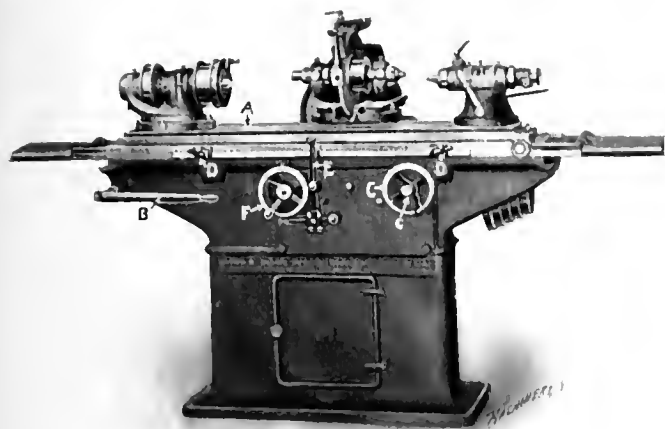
A Universal Grinder built by the Brown & Sharpe Mfg. Co.
